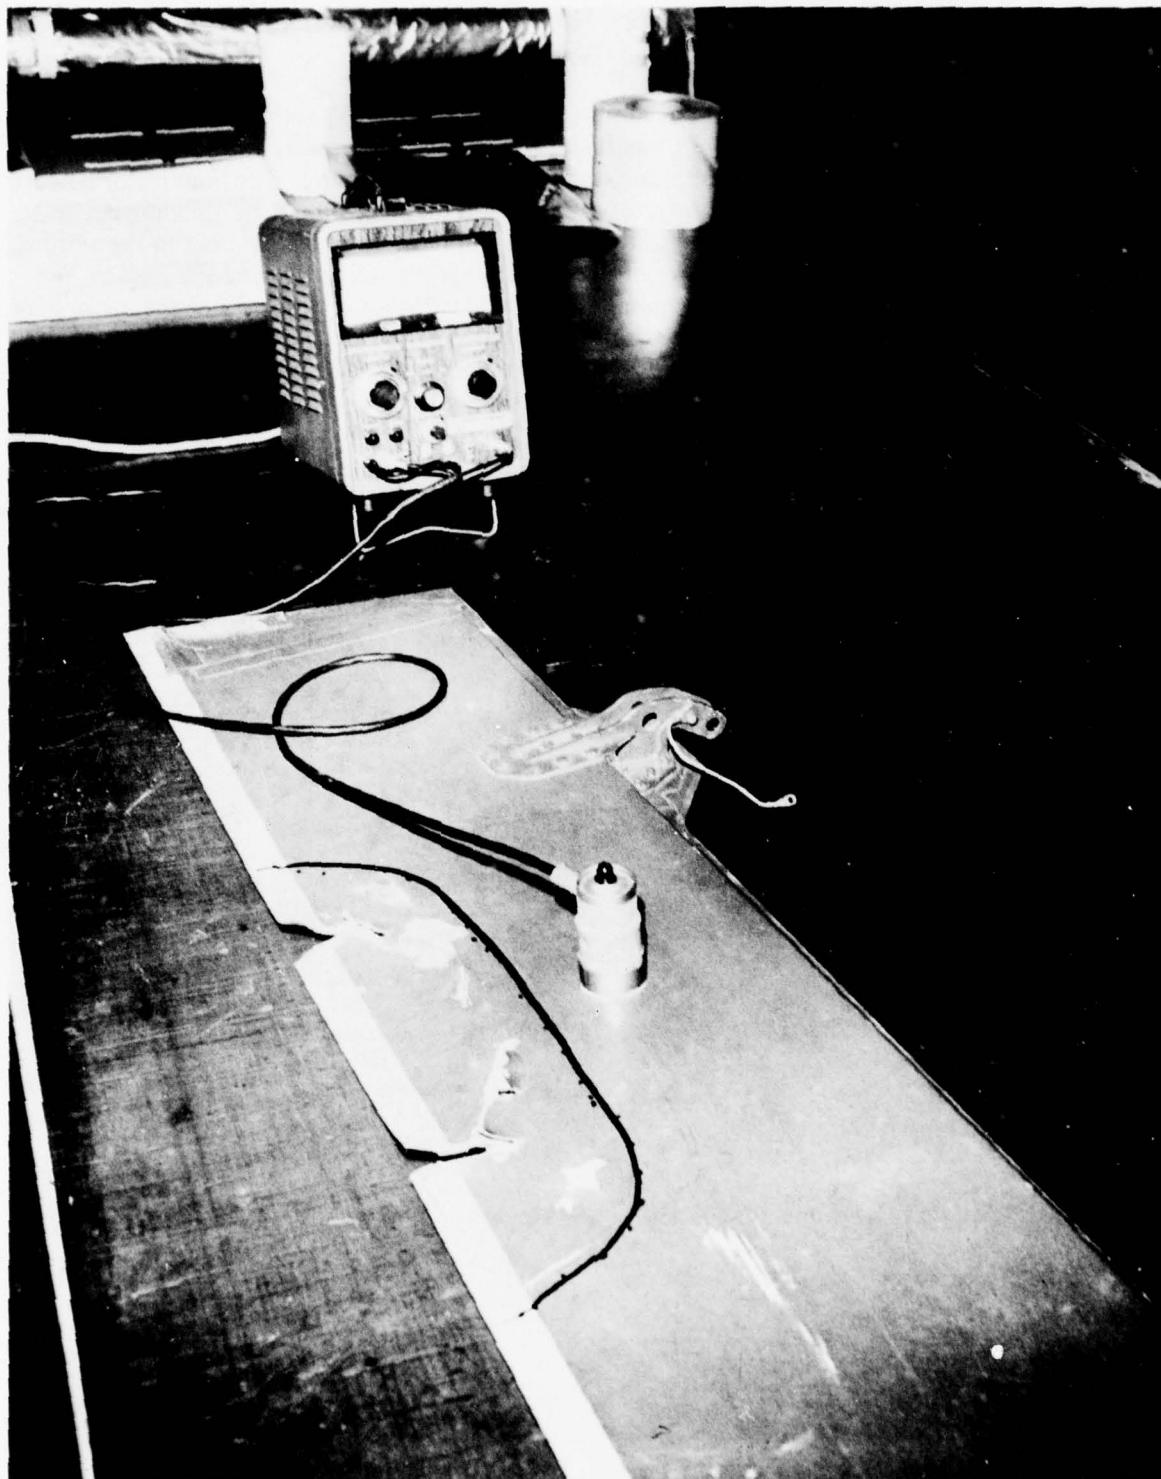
Harmonic Bondtester Being Used to Inspect Honeycomb Component
